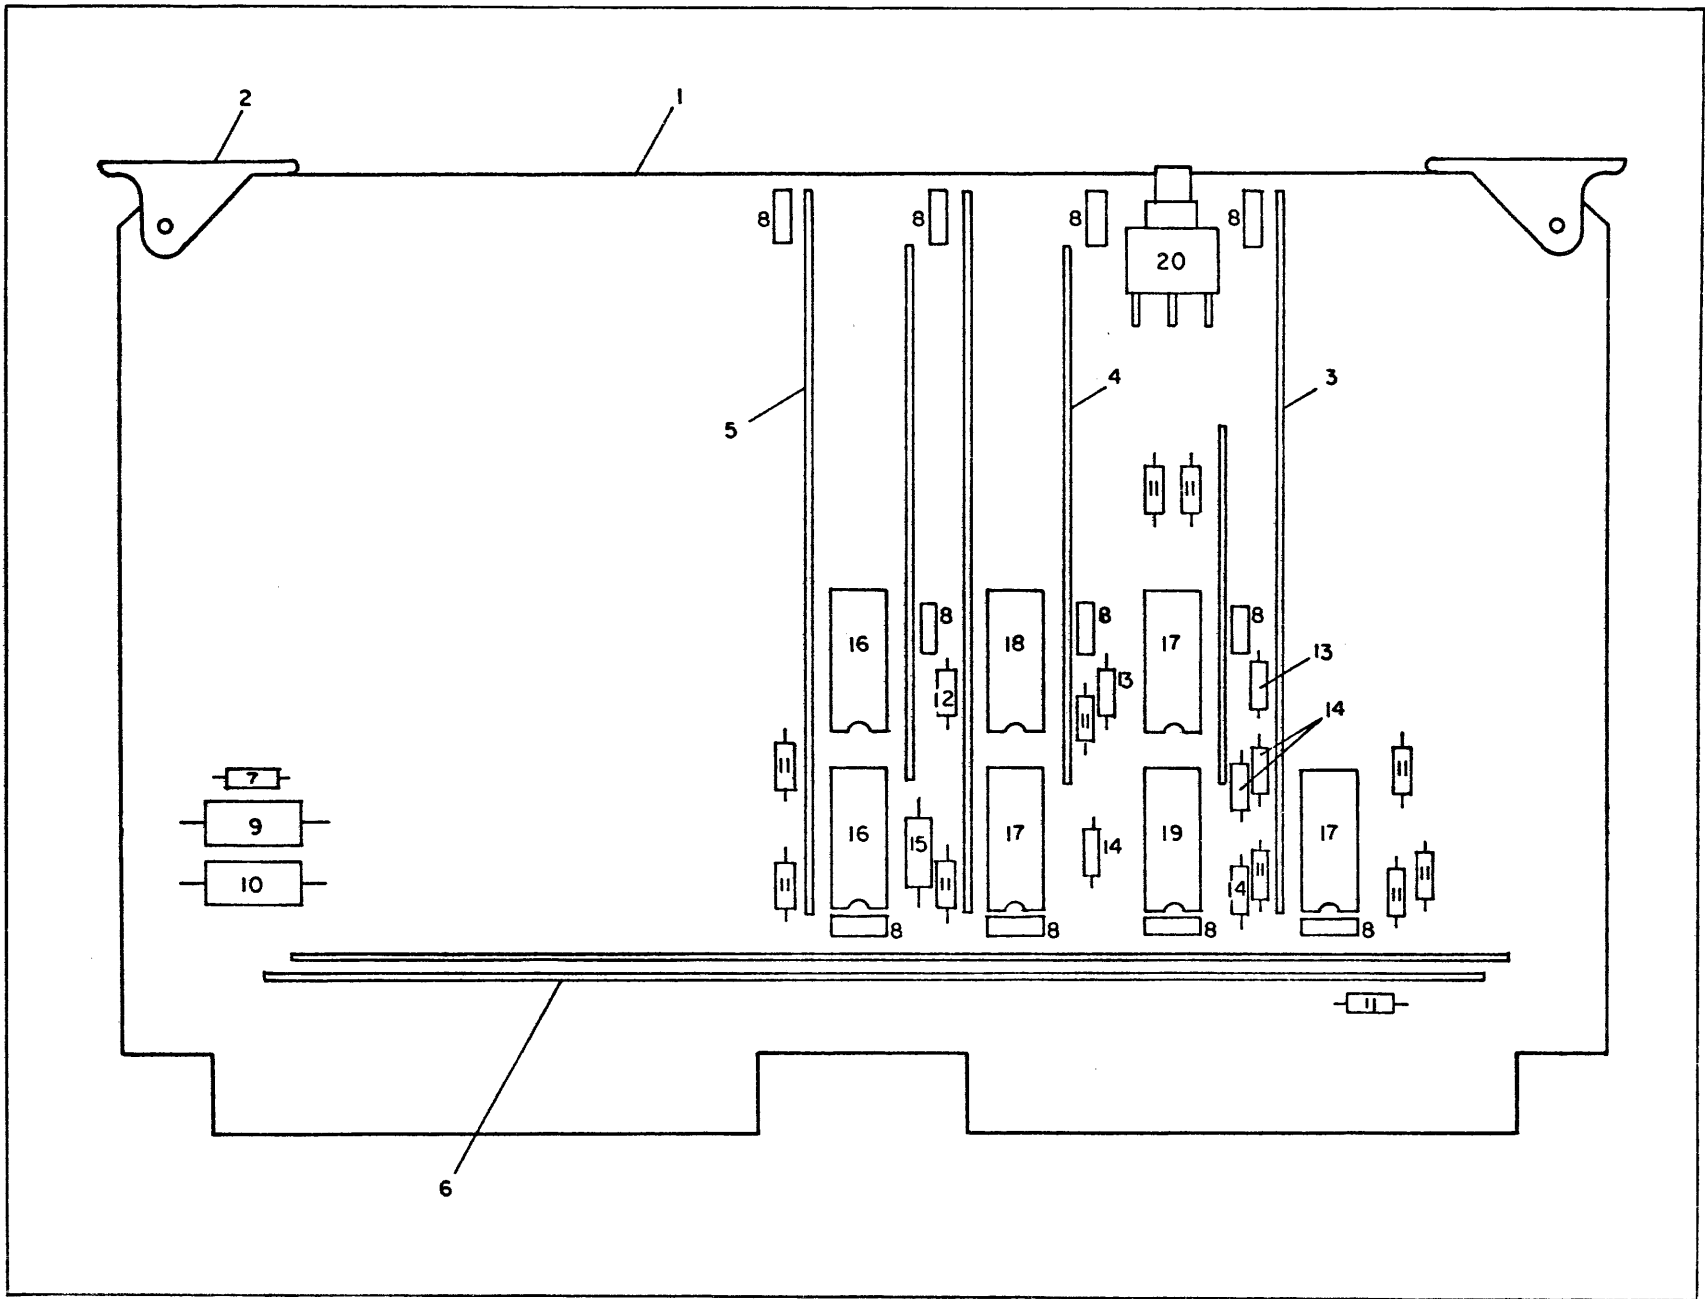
P. C. ASSEMBLY, RECEIVER CARD (Model 2892A)
